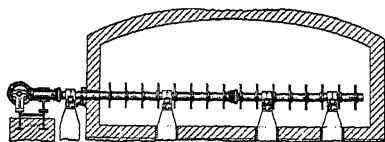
Cross-section of a wide furnace with rollers supported at three points in the furnace.
